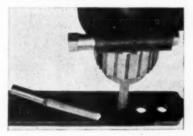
With a standard "Hardsteel" drill, it is easy to drill right thru an ordinary shop file.
